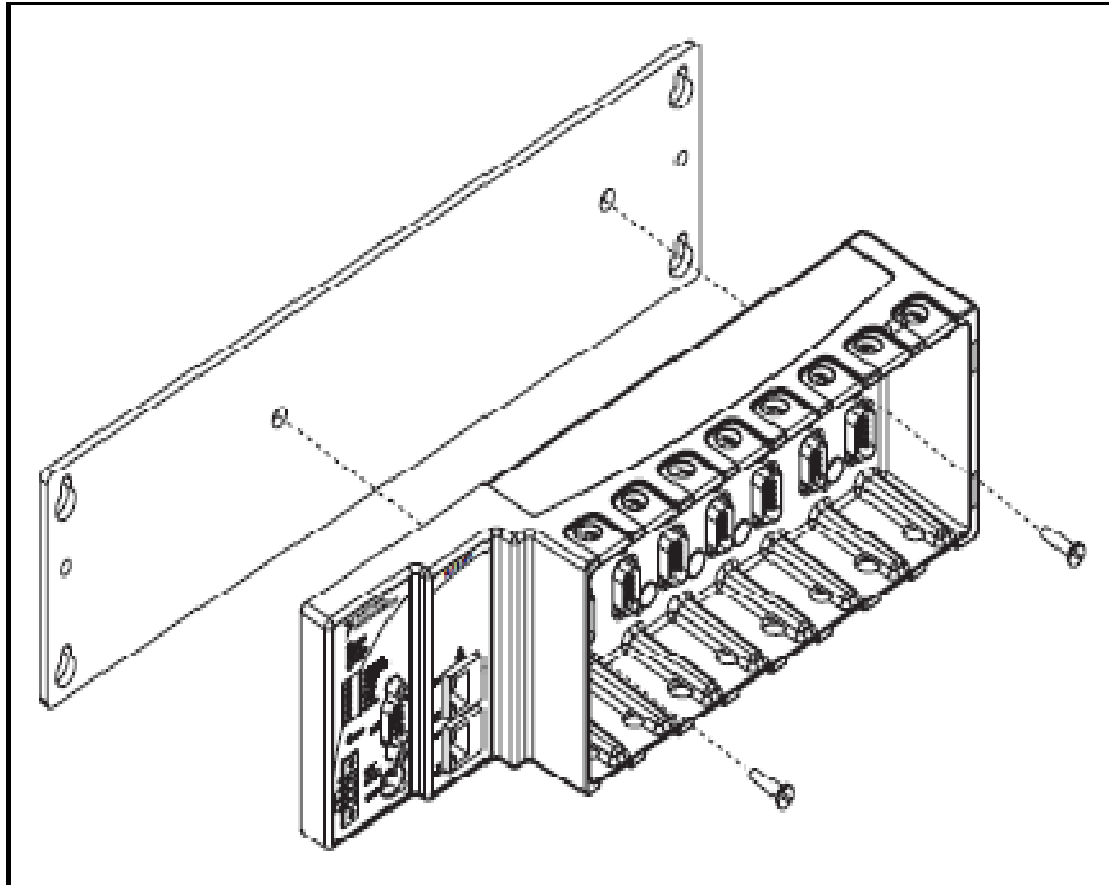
Installing the Panel Mount Accessory on the cRIO-9072/3/4
